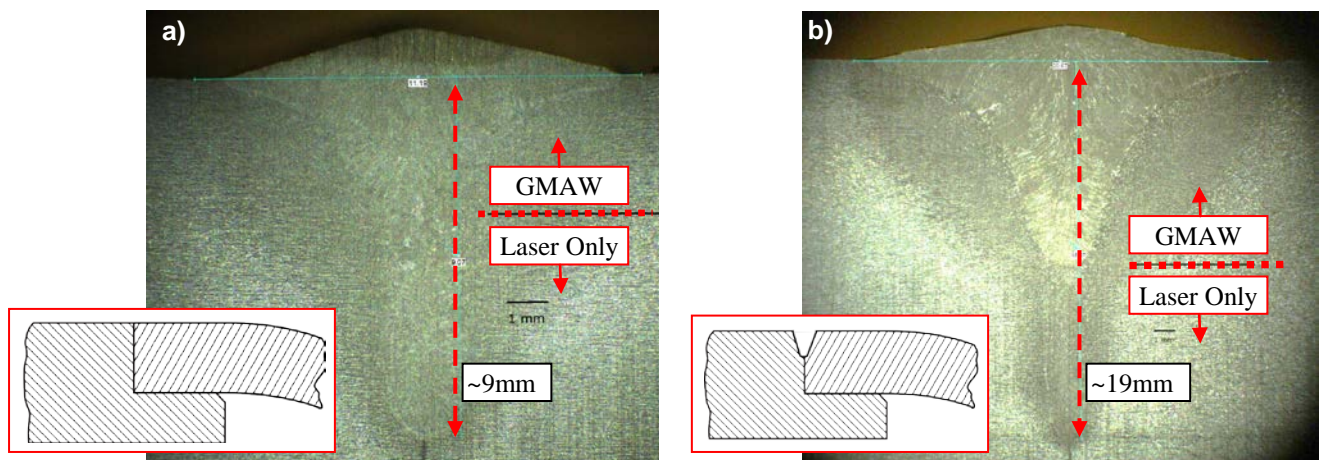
Typical Hybrid Laser Arc Weld Micrographs (a) Butt joint (no preparation) (b) ~8mm V-groove joint preparation
